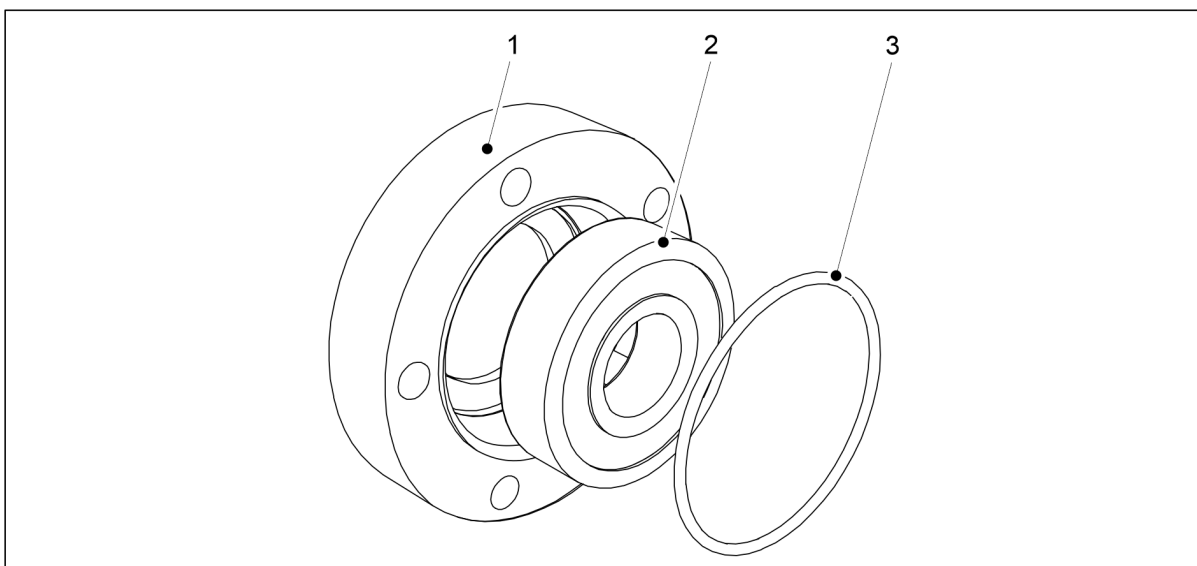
307. Removing the bearing and O-ring
